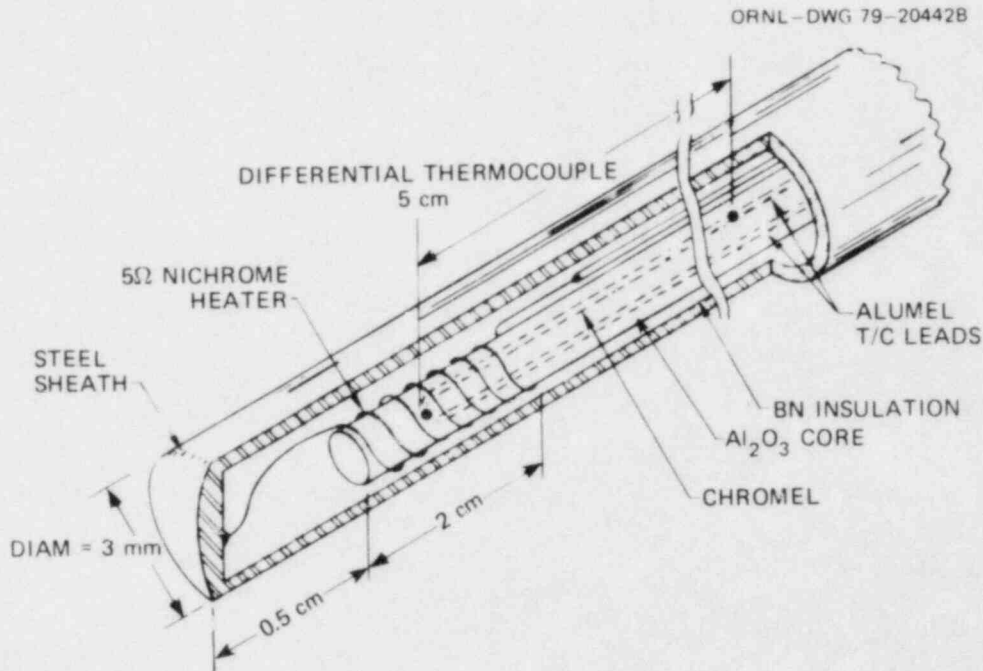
HTC coolant sensor (ORNL II) fabricated by FRS Fabrication Group.
